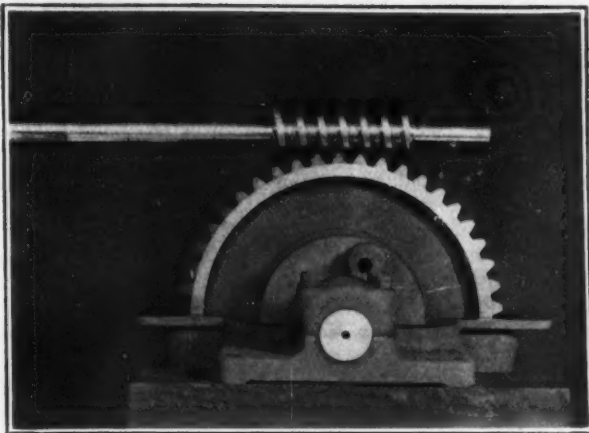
View of Worm and Gear with Upper Part of Case Removed.
